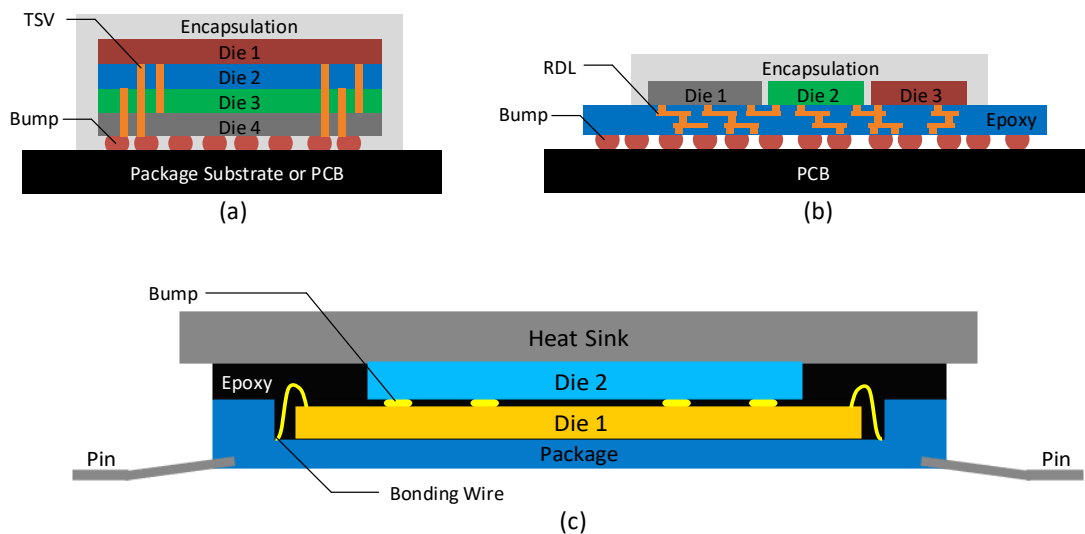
Exemplary SiP technologies combining several dies in one package, including (a) TSV, (b) InFO, and (c) dual-die flip-chip packaging.
